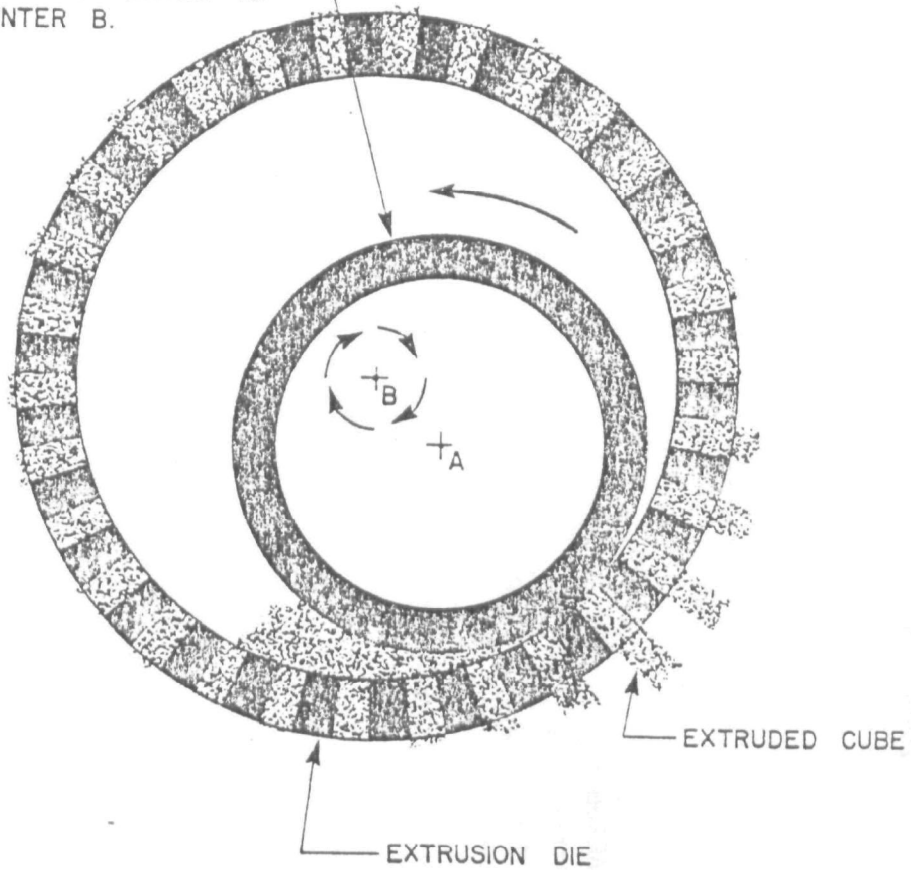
Cross section - extrusion dies of the John Deere Cubing Machine.
